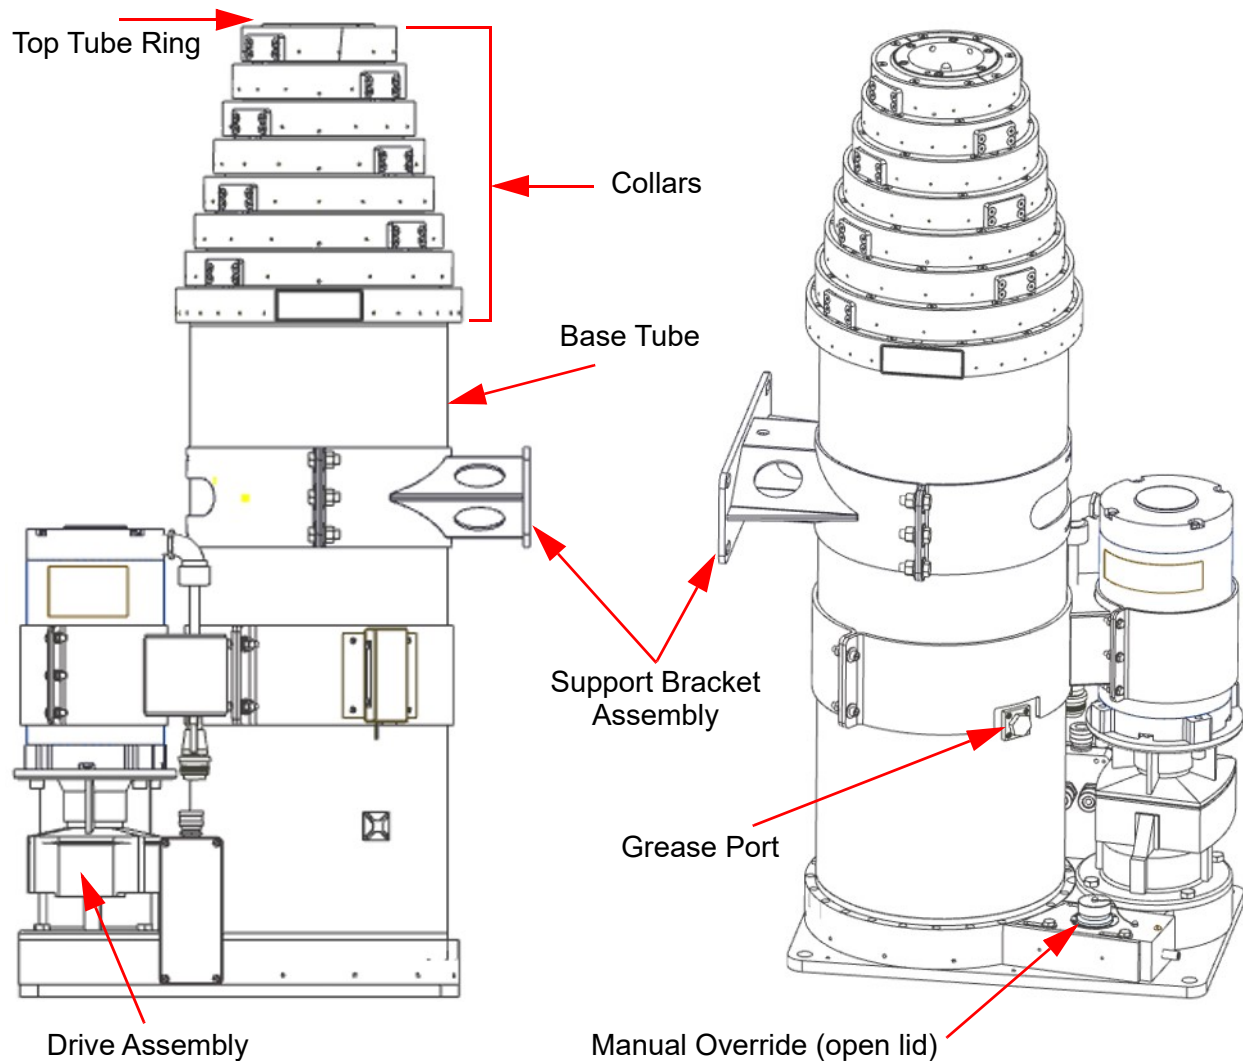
Mast (4-Meter Stiletto P/N: 711290461 Shown)
